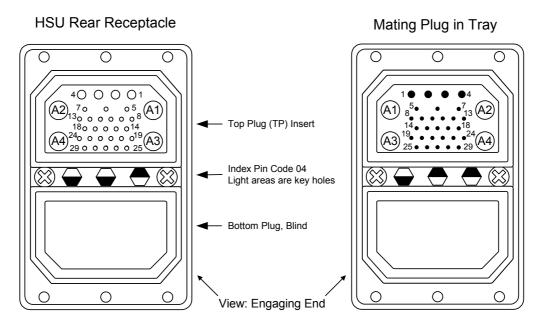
HSU Rear Receptacle and Mating Plug in Tray, Engaging End.
